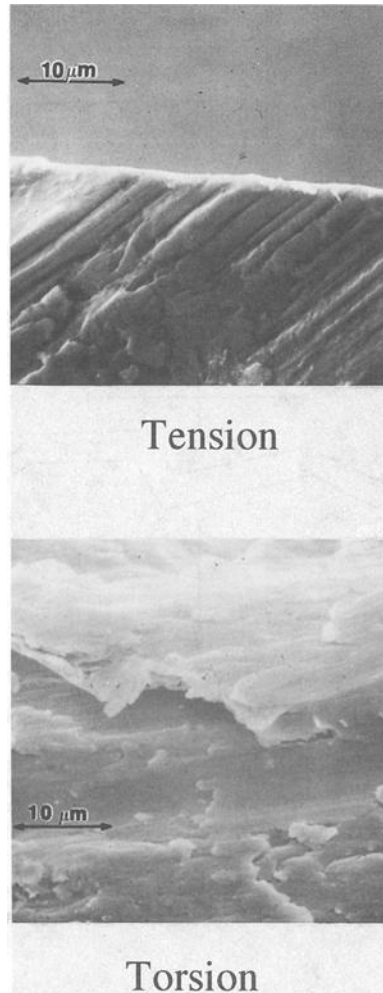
Comparison of fracture surfaces in tension and torsion.
